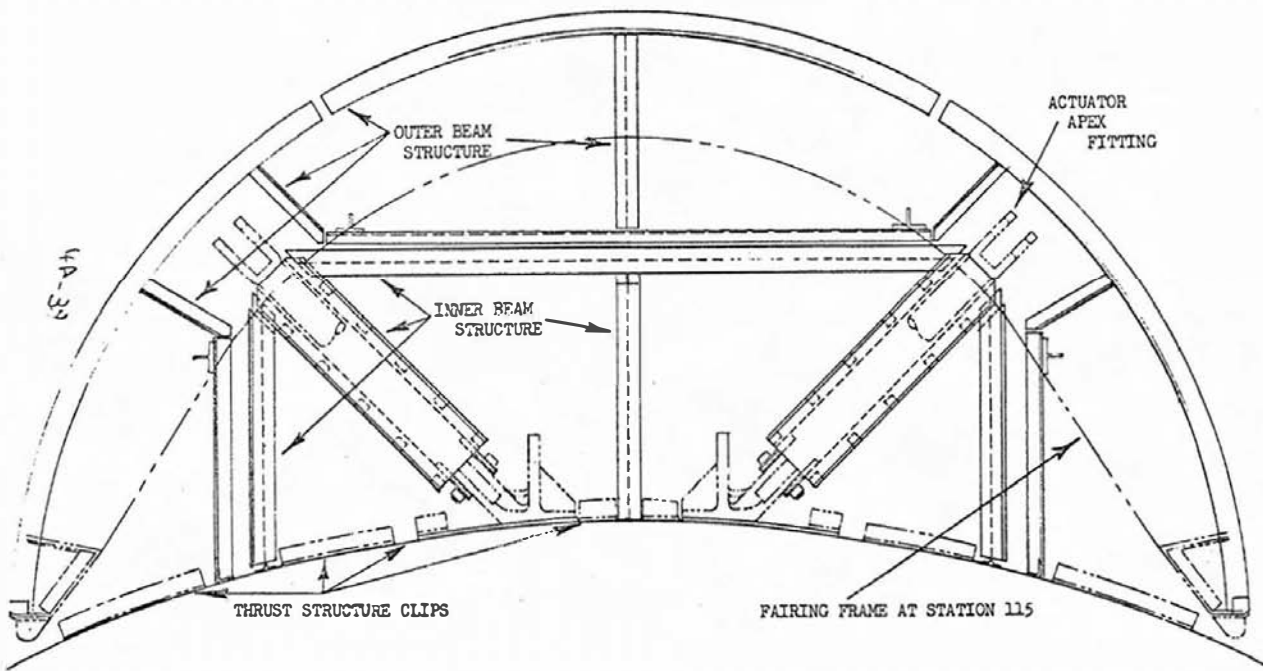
39. Engine Fairing Heatshield Flight Panel Support Structure
